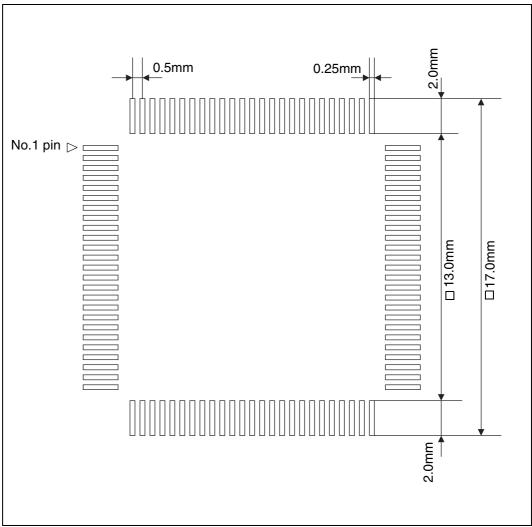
Recommended dimensions of the footprint for mounting the NQPACK
